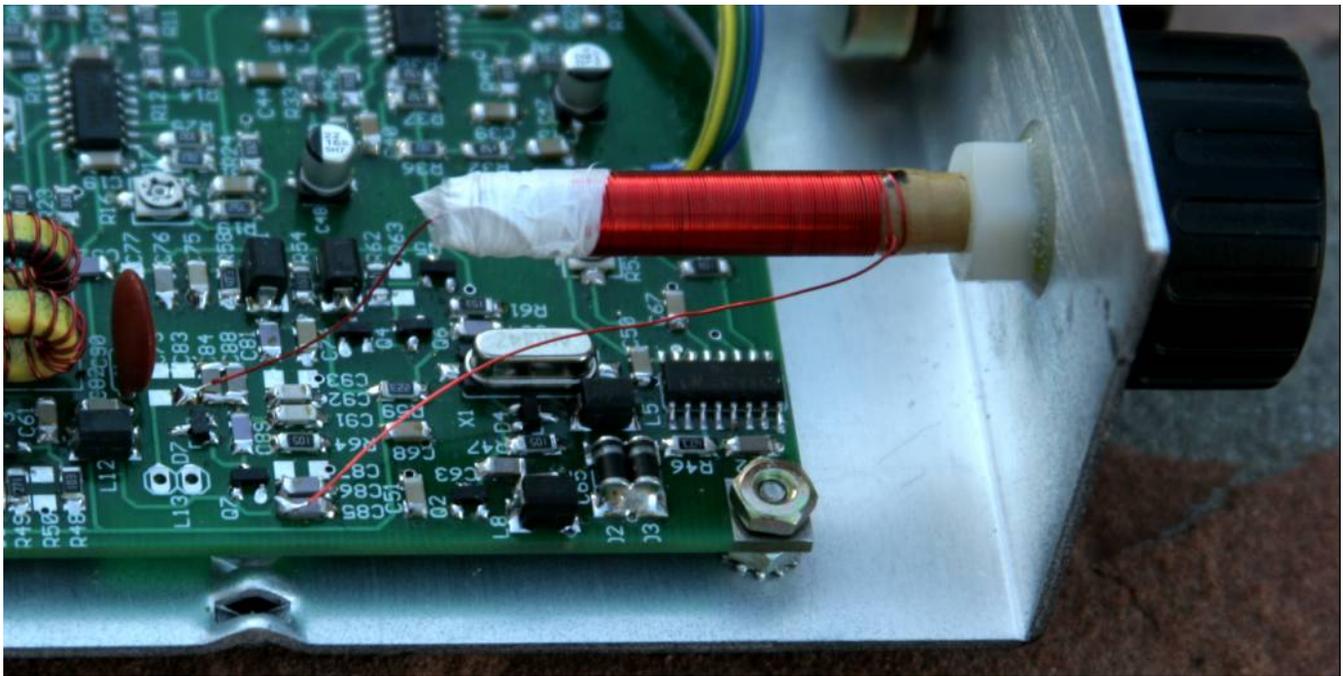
Main tuning PTO coil L13 shown mounted to the front panel. This is used only when the rig is finished.
